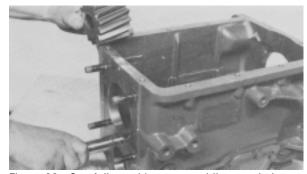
Carefully position reverse idler gear in housing. Use caution as not to disrupt needle rollers. Insert idler shaft through case and idler gear needle rollers.
